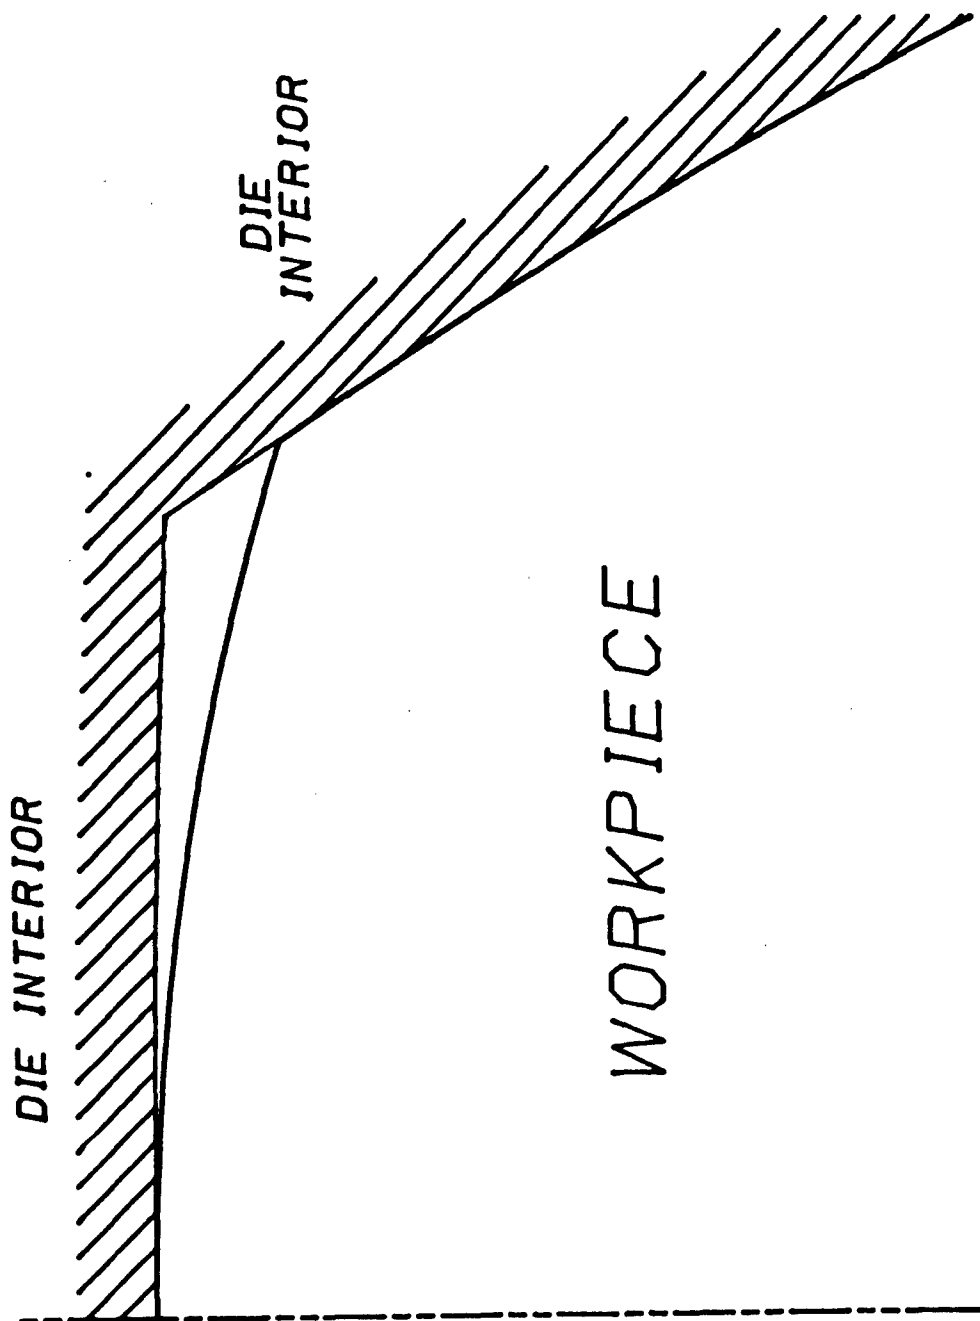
Assumed Initial Workpiece-die Configuration at the Gear Tooth Corner
